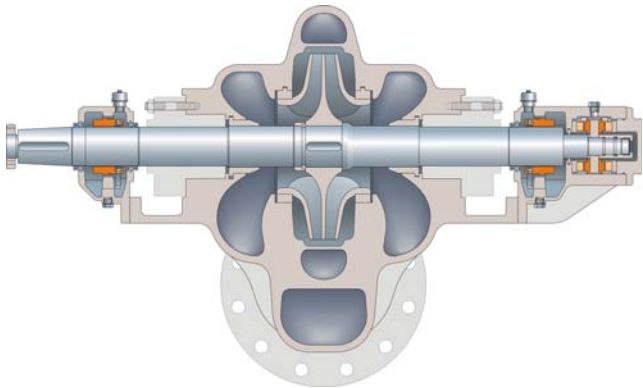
Sulzer HSB pipeline pump with tilting-pad thrust bearings
